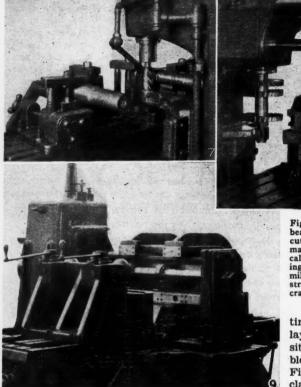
Using an outboard bearing to support a helical cutter on a vertical milling machine. Fig. 8—Two vertical cutters with outboard bearings in use on a Milwaukee miller. Fig. 9 — Fixture for straddle milling faces of crankshaft bearings on a cylinder block.
